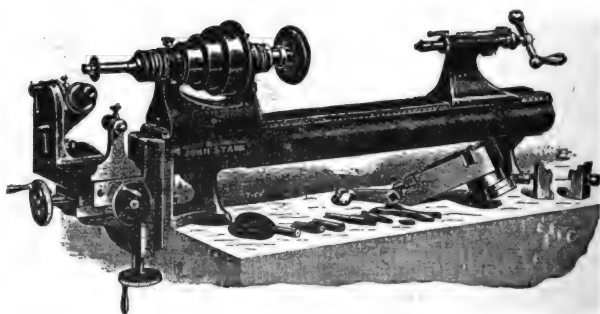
A gear-cutting attachment fixed to the head of a precision lathe.
